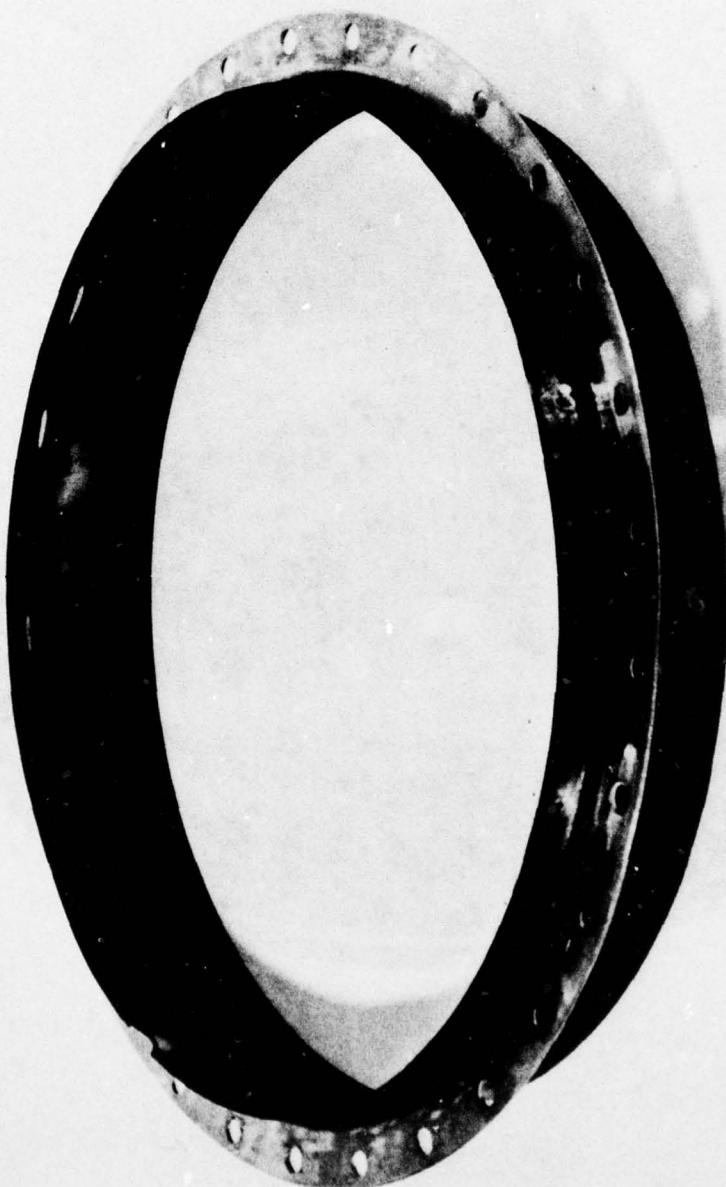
WR33 Combustor Assembly - P/N 100 (View 3)
